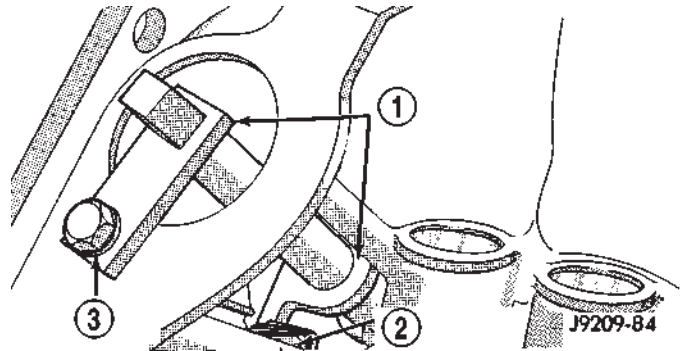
Camshaft Holding Tool C-3509 (Installed Position)
